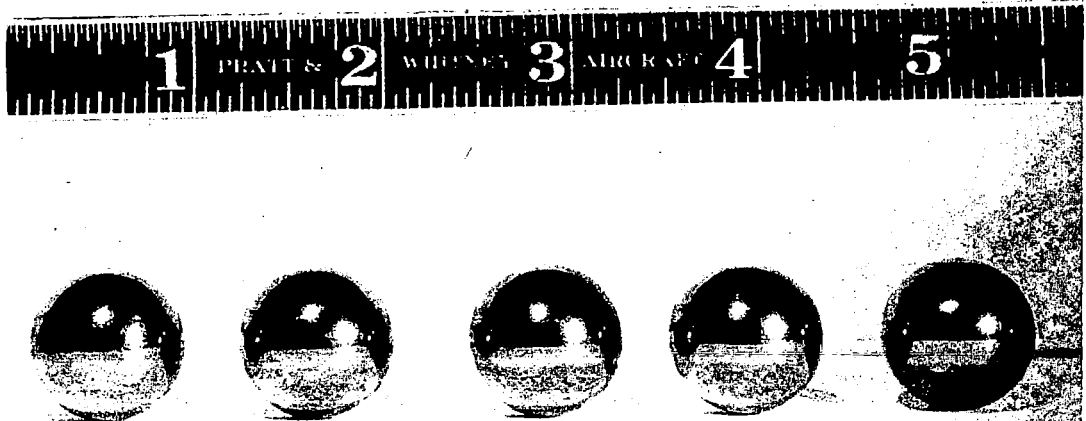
Appearance of Typical Solid Balls — Baseline Bearing S/N 2528A-1
